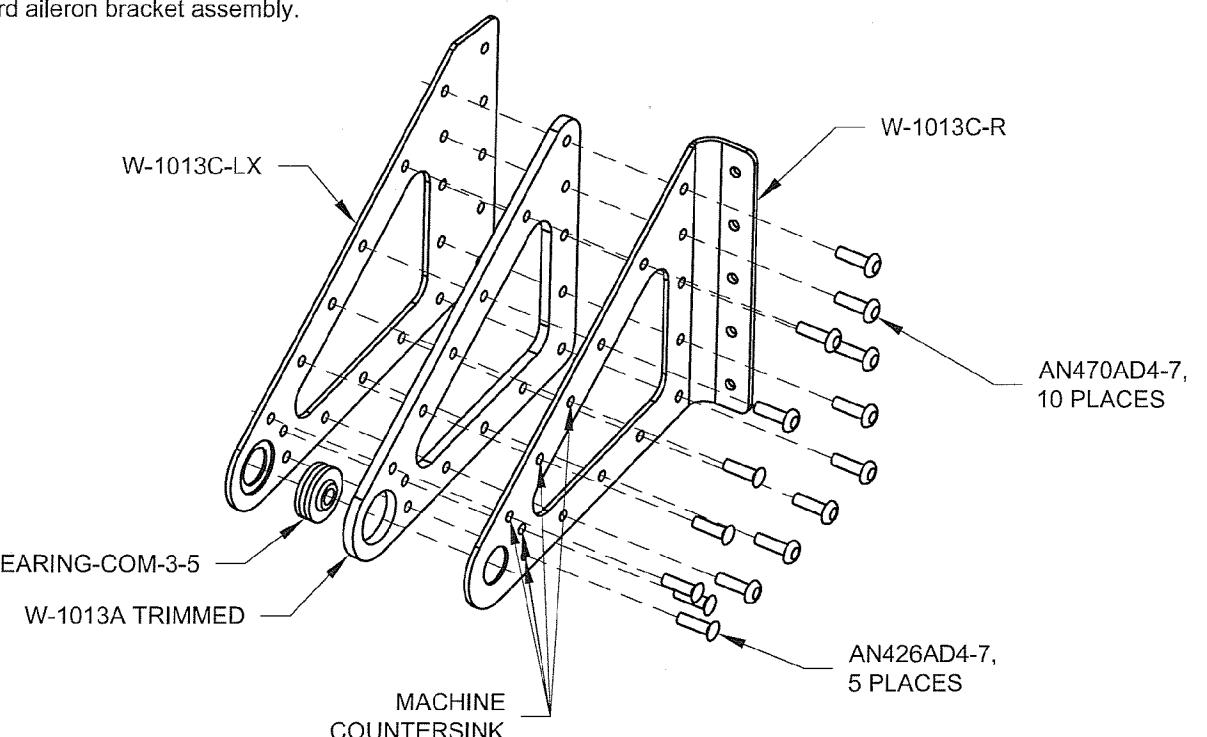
OUTBOARD AILERON BRACKET ASSEMBLY
